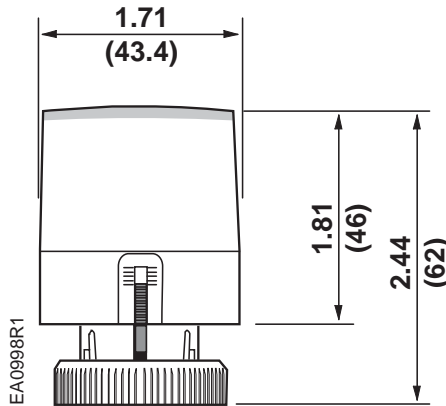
ESZ7 Thermic Actuator Dimensions Inches (mm).
